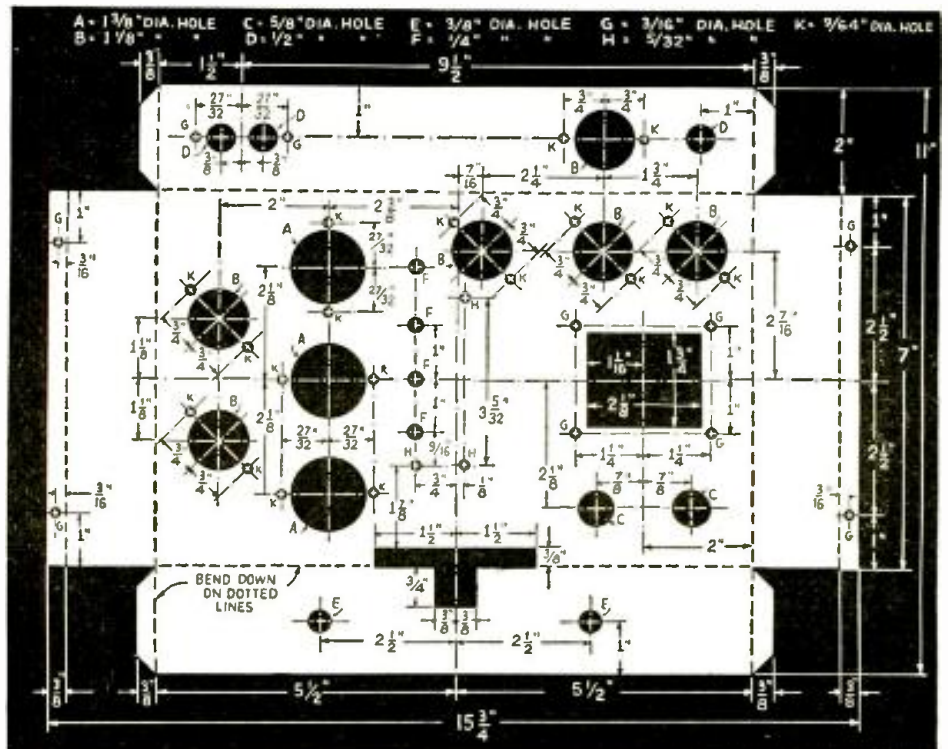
Chassis drilling details for the T.R.F. receiver.
